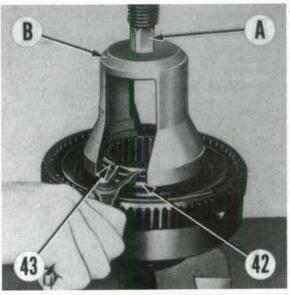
Use a press and suitable horseshoe shaped tool to compress direct drive clutch piston return spring when removing and installing snap ring.
